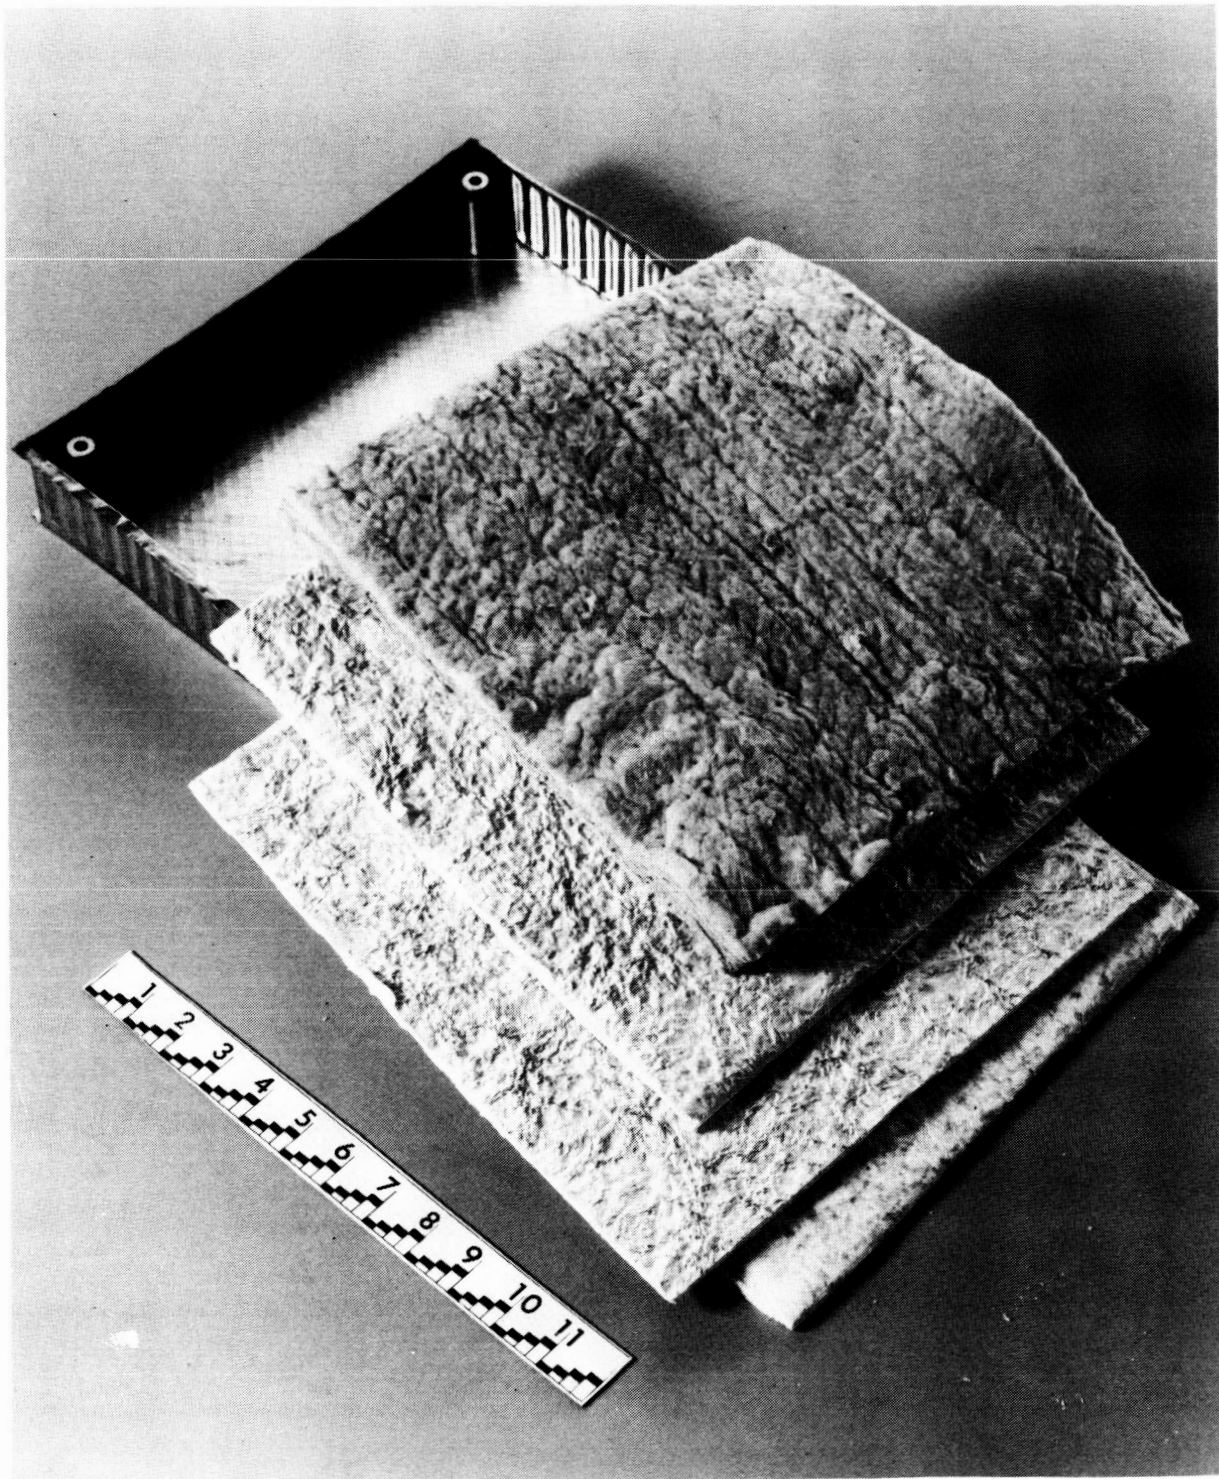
Pre-cut Q-Fiber Felt and DYNAFLEX Ready to be Installed into the INCONEL 617 Subassembly
